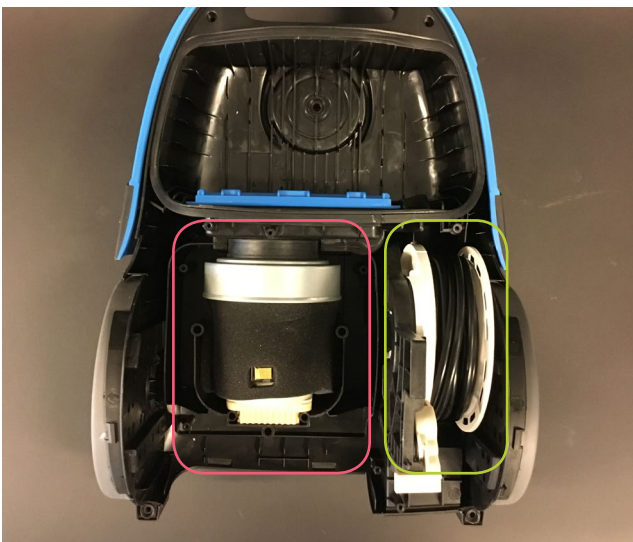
, Independent disassembly of motor and cord-winder in Philips FC85XX series
